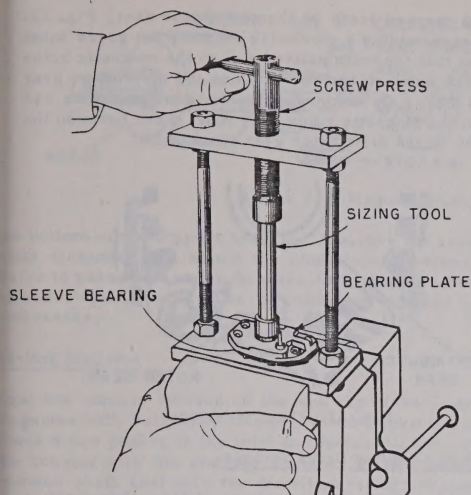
Pressing Sleeve Bearing into Bearing Support
